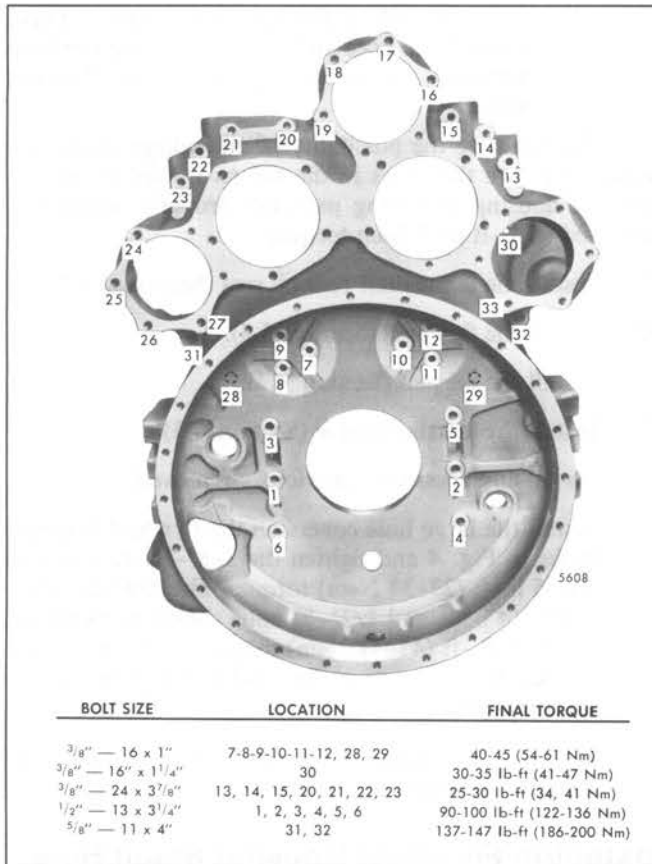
Flywheel Housing Bolt Tightening Sequence (Operation 2)
